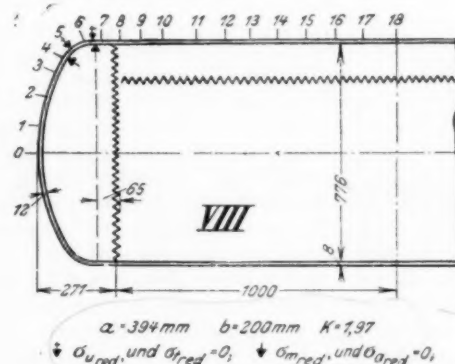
ELECTRICALLY WELDED VESSEL WITH ELLIPTICAL CROSS-SECTION OF HEAD
